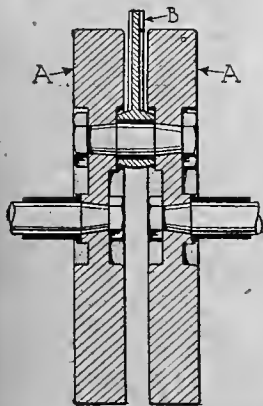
(B) Connecting rod. Forces are transmitted direct from crank pin to the flywheels.
